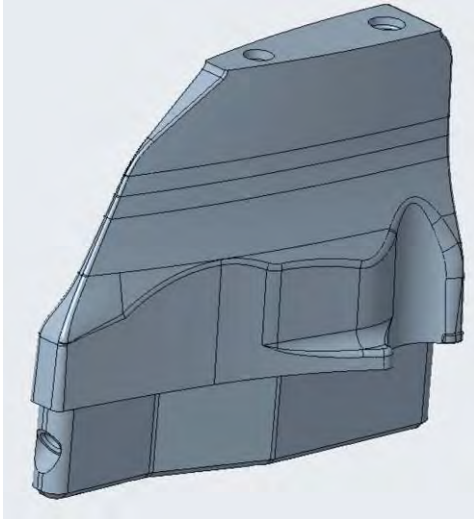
An exhaust insert that requires 220 draw stone polishing prior to PVD coating.
